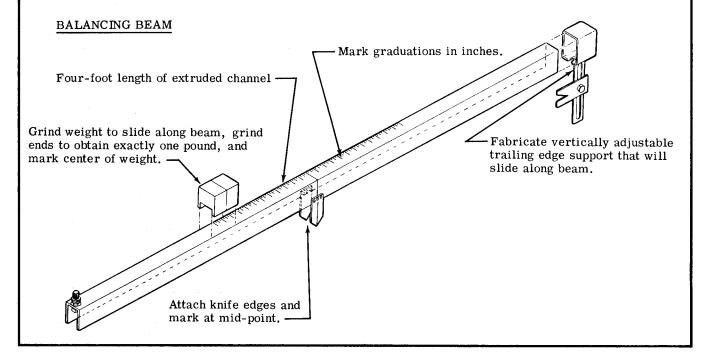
Control Surface Balancing (Sheet 1 of 3)
